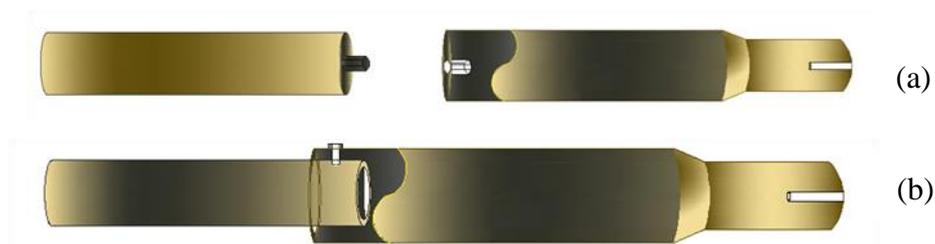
The assembly structure diagram, (a) the hexagonal assembly model and (b) the bolt fastening model
